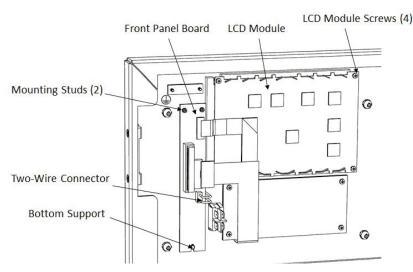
Replacing the Front Panel Board and the LCD Module
